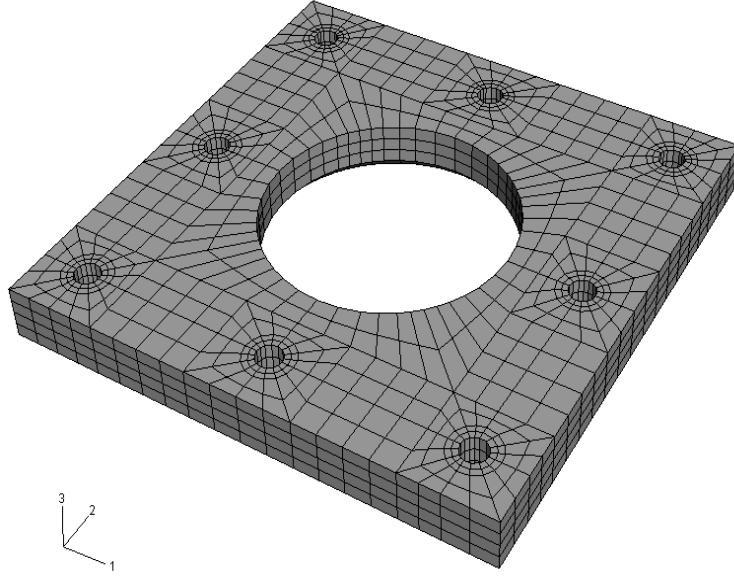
Plate specimen fixture; top plate component finite element mesh.
